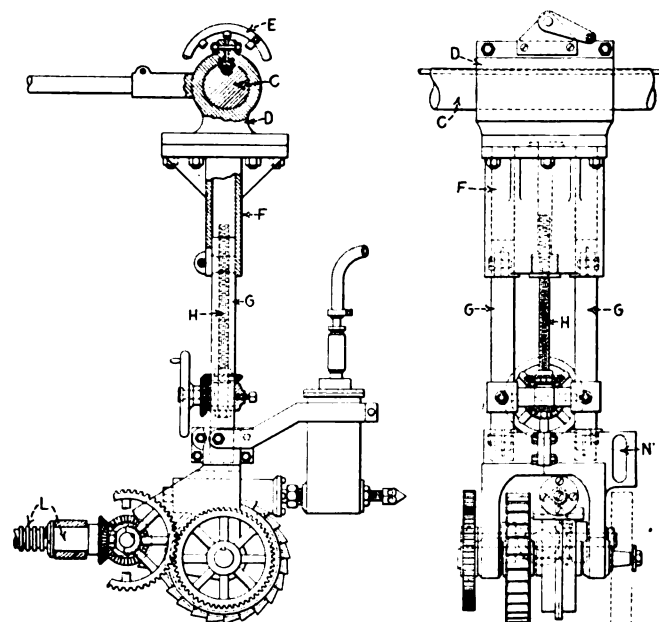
Miller head and radius arm for the cylinder saddle radial miller
